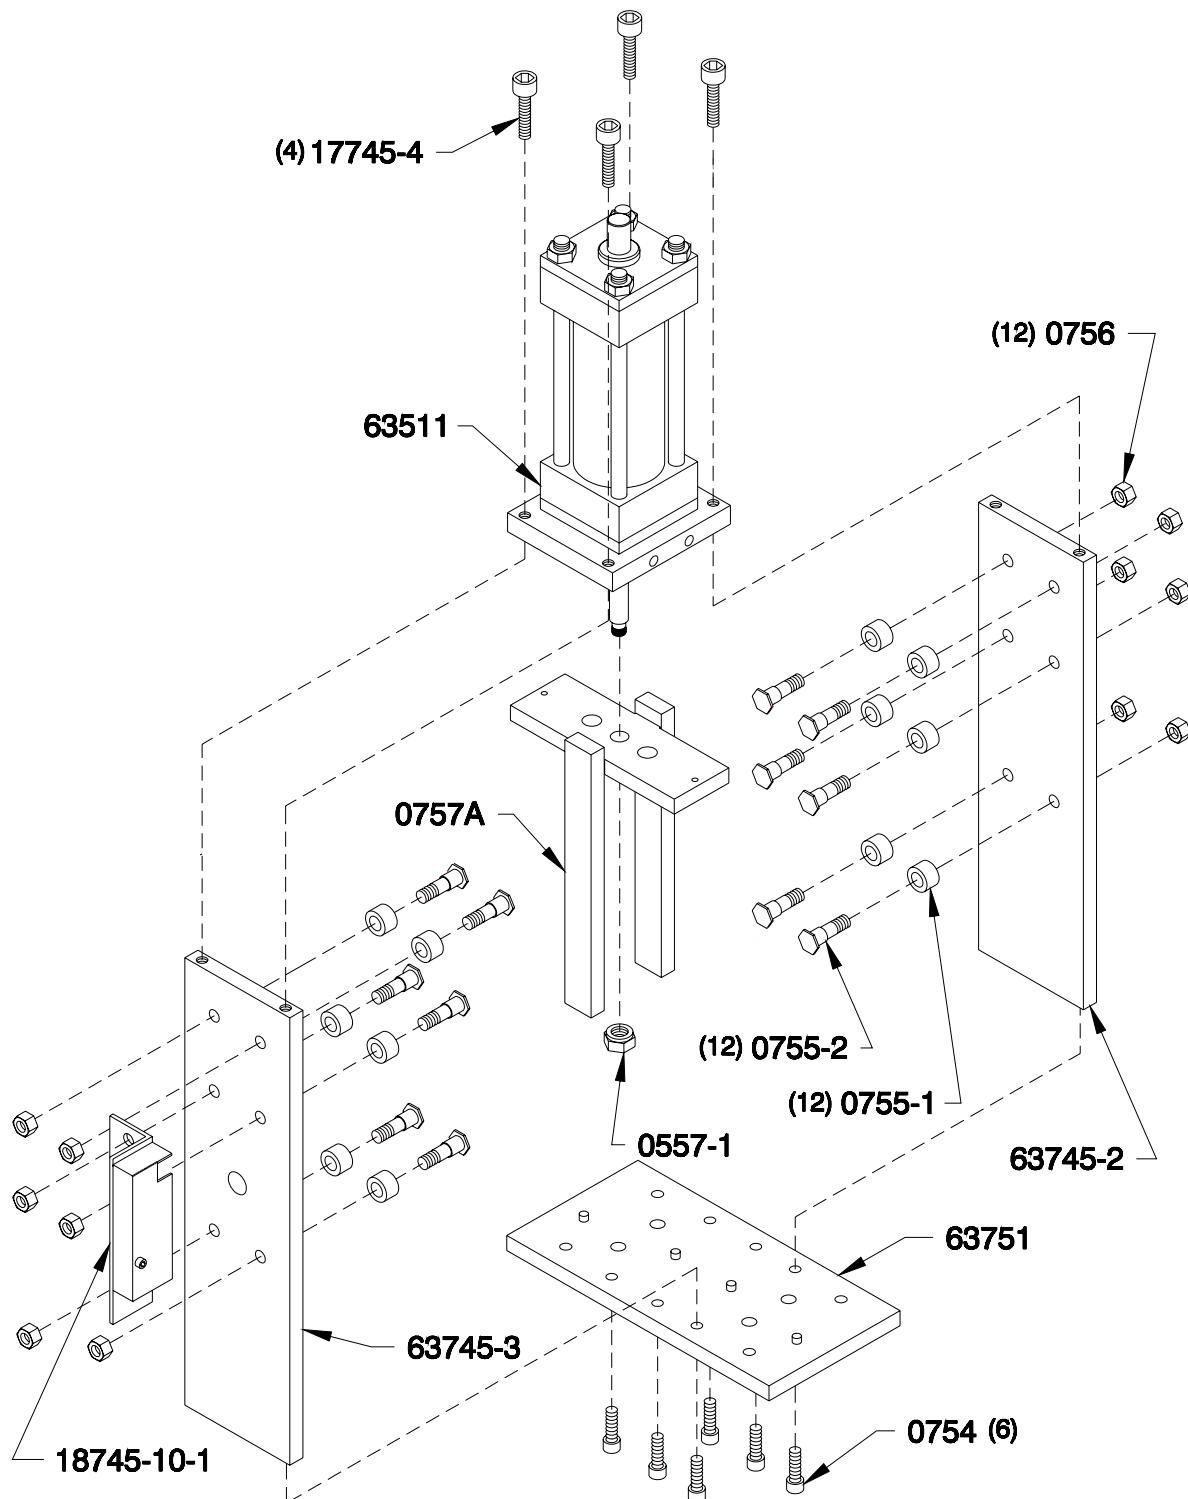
Hydraulic Motor Assembly (Part No. 63745), Exploded View
